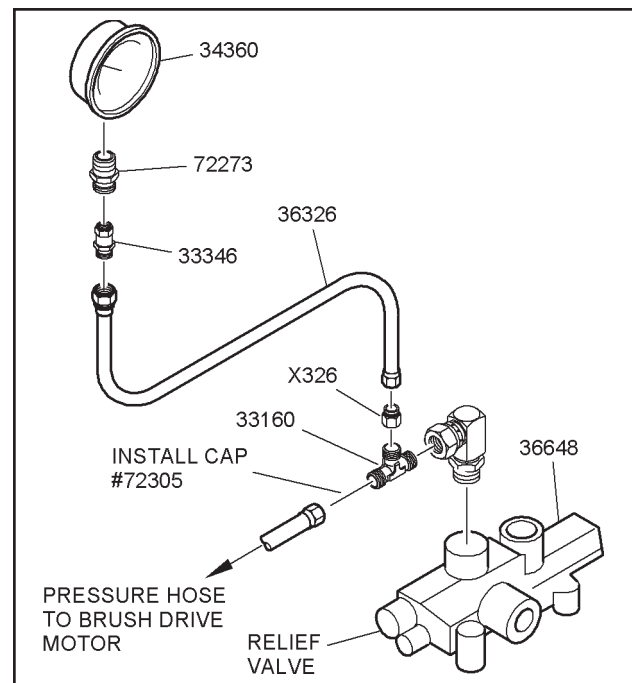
SETTING BRUSH DRIVE RELIEF VALVE
